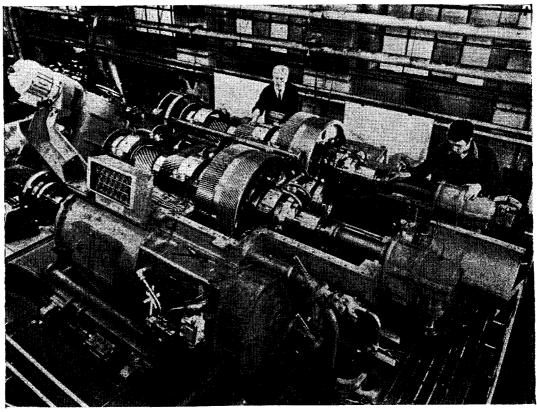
H.M.S. 'EXMOUTH' GEARBOX DURING ASSEMBLY (Courtesy David Brown Gear Industries Ltd.)
